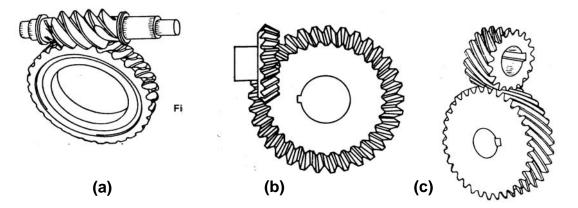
Gears transmitting power between non-parallel non intersecting shafts. (a) worm and worm wheel, (b) hypoid gear and (c) spiral gears.
